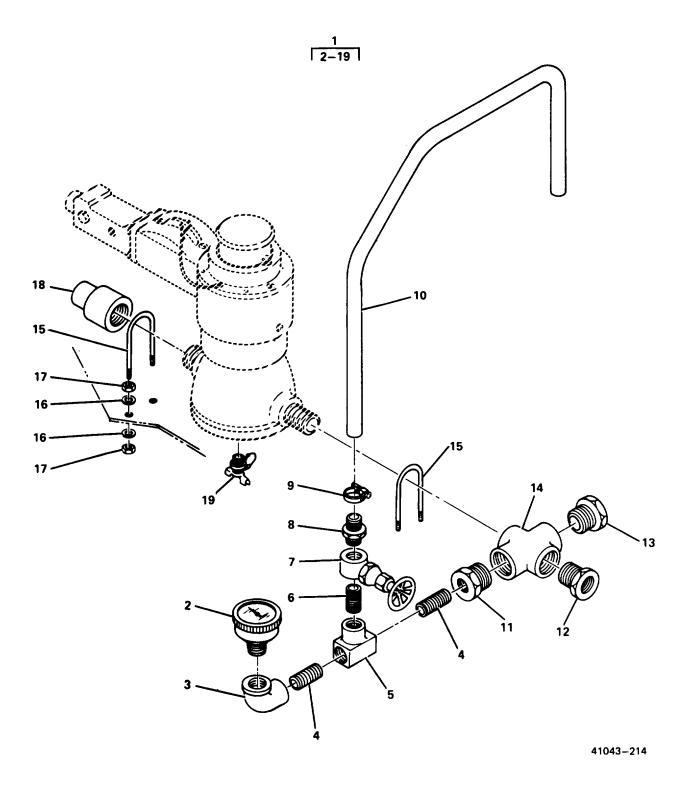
Manifold Assembly With Pressure Gage, Globe Valve, and Fill Hose
